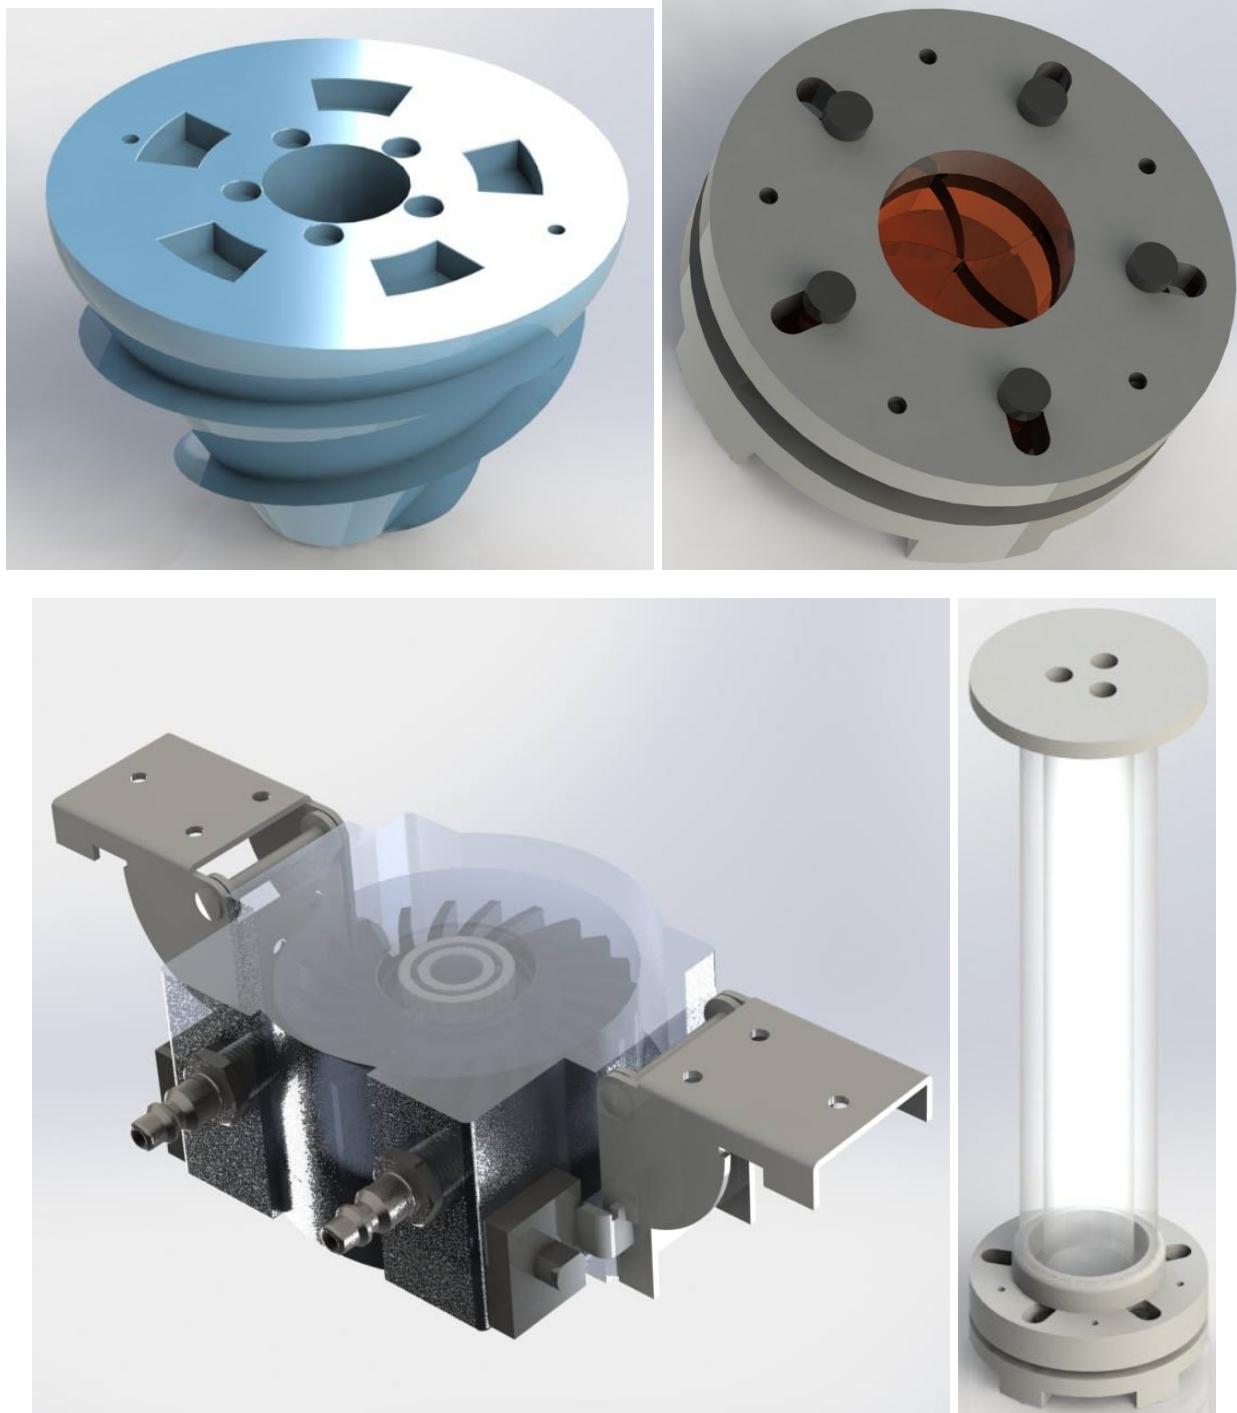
Iteration III of the Lion Drill: bottom piece, mechanical iris, pneumatic turbine, sampling tube
